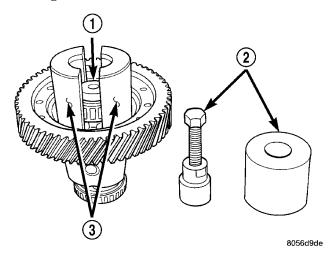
Position Button and Collets Onto Differential and Bearing (Ring Gear Side)
